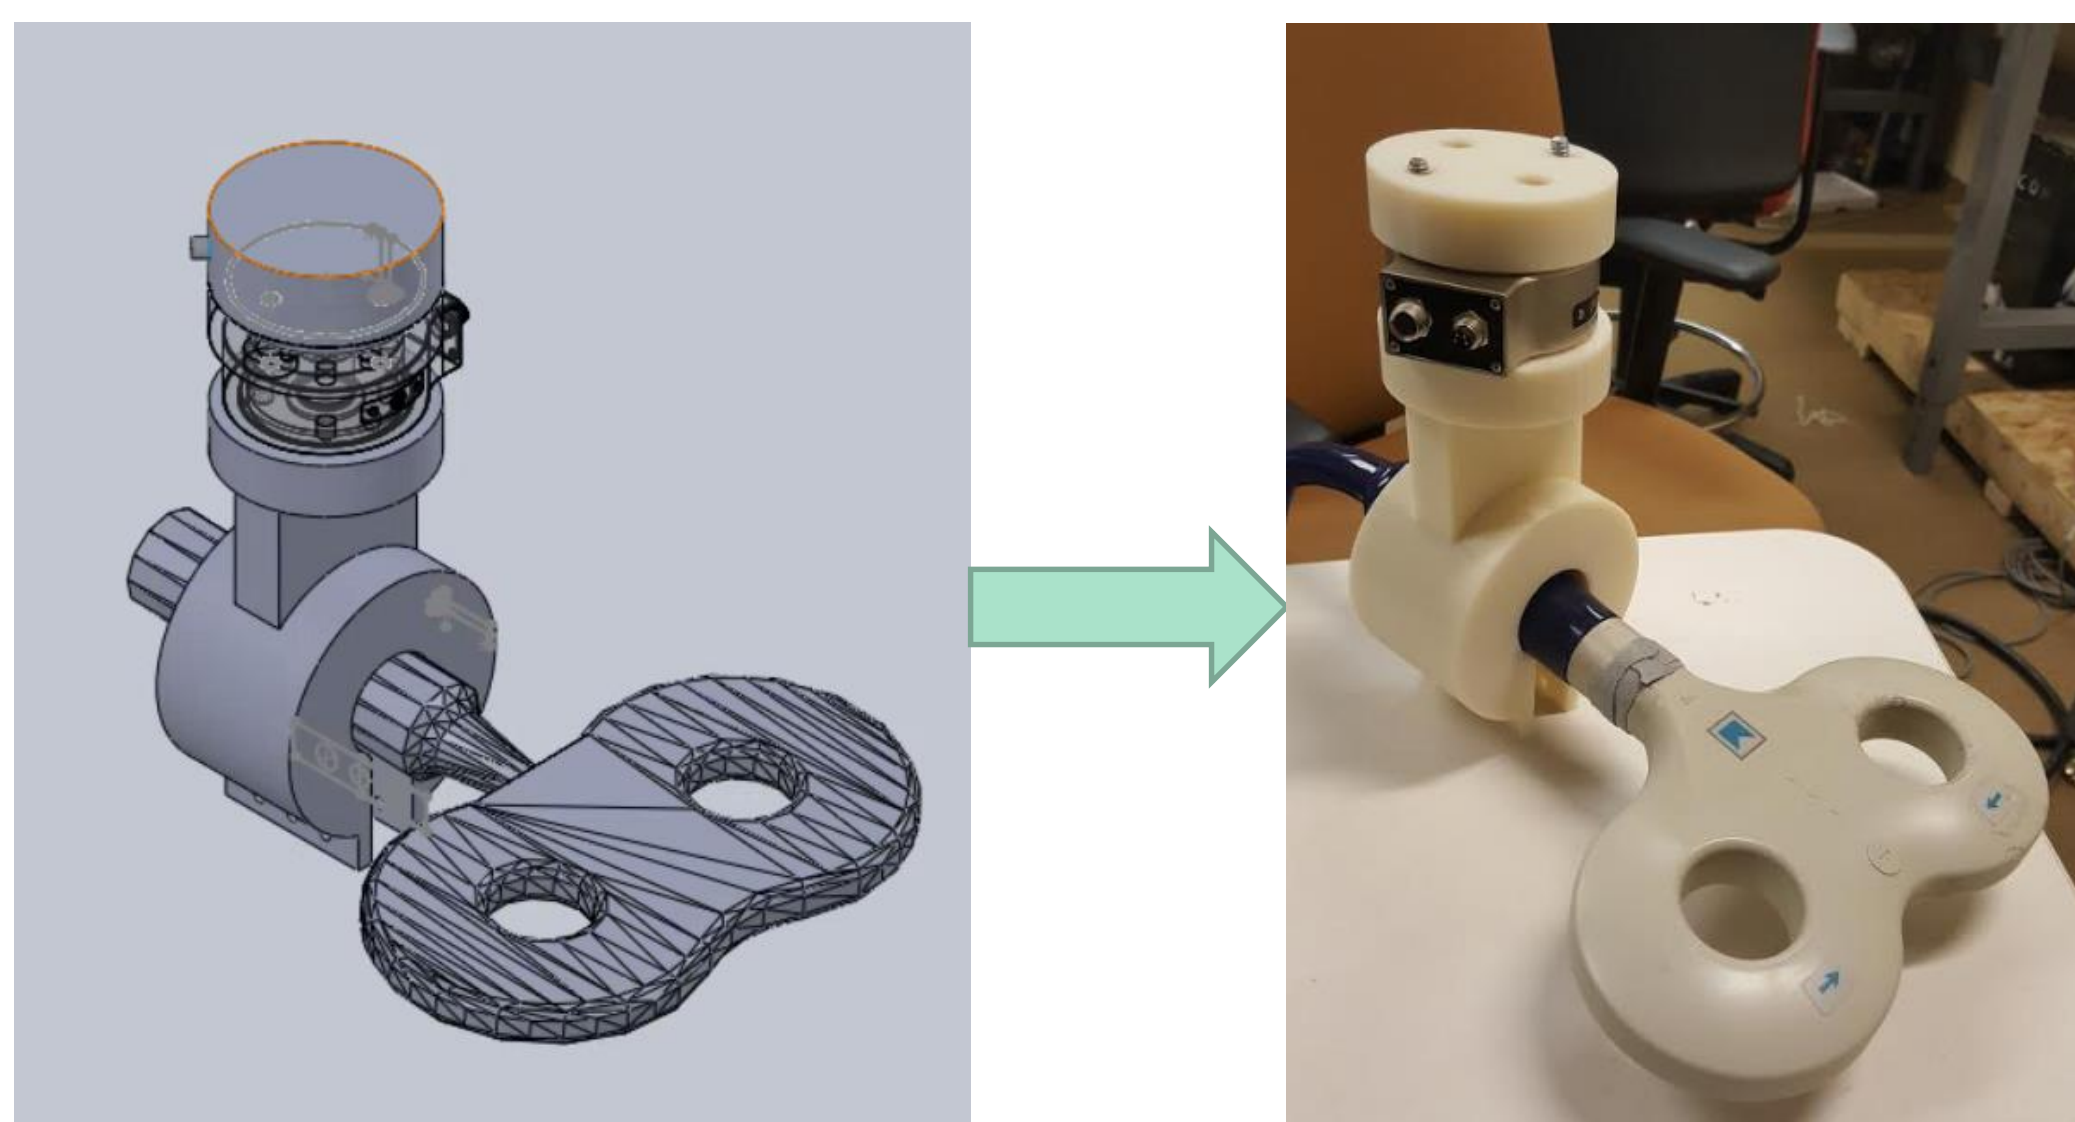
The CAD model of the custom tool (End effector is on top, coil is on bottom) along with the assembled parts (no UR5).
